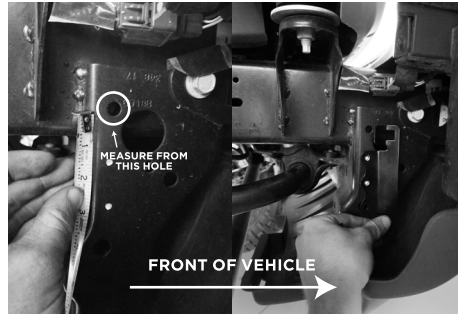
NON-RUBICON(passenger side): Use the top 2 holes on the bracket to mount.
